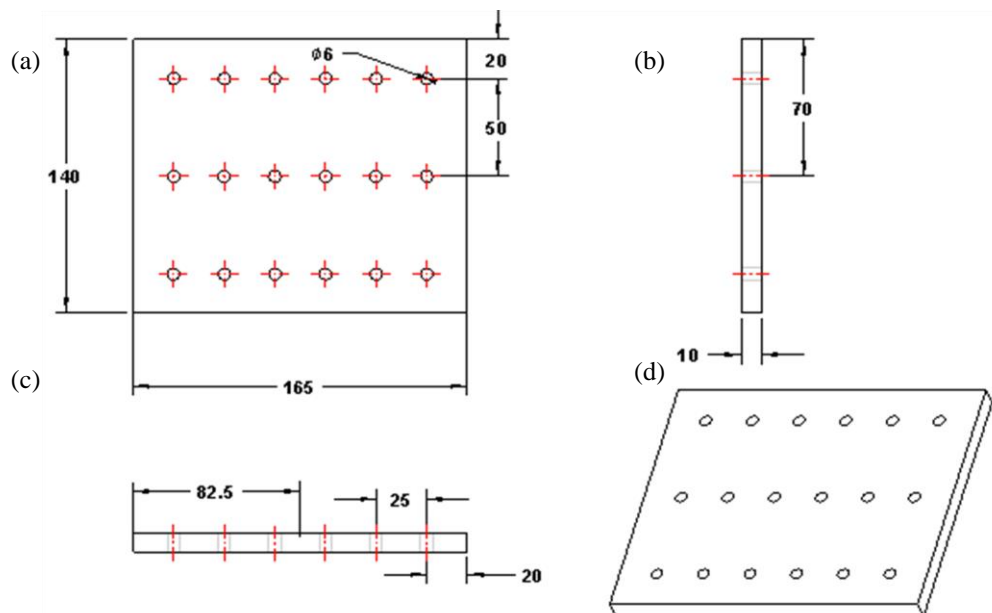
2D drawing of the (a) projected front view, (b) projected side view, (c) projected top view, and (d) three-dimensional CAD model of the base plate to mount the height adjustment system (all dimensions in mm).
